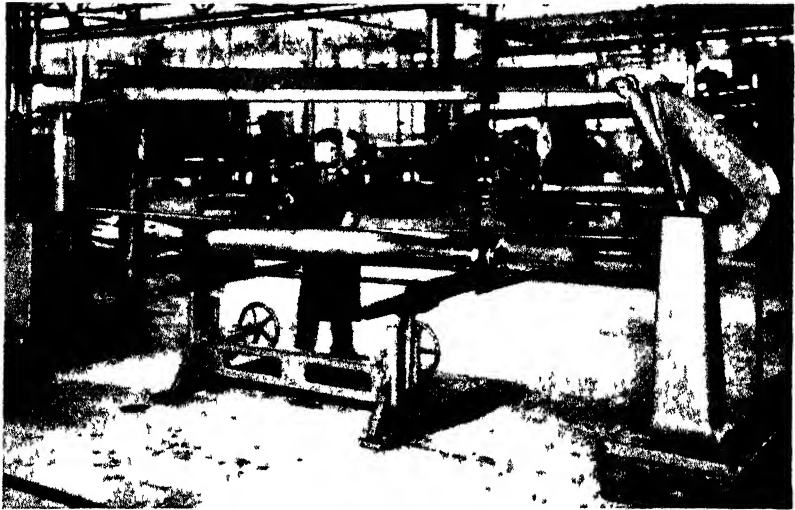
A.—Abrasive belt for reducing thickness of tube of which propeller blade is made.
